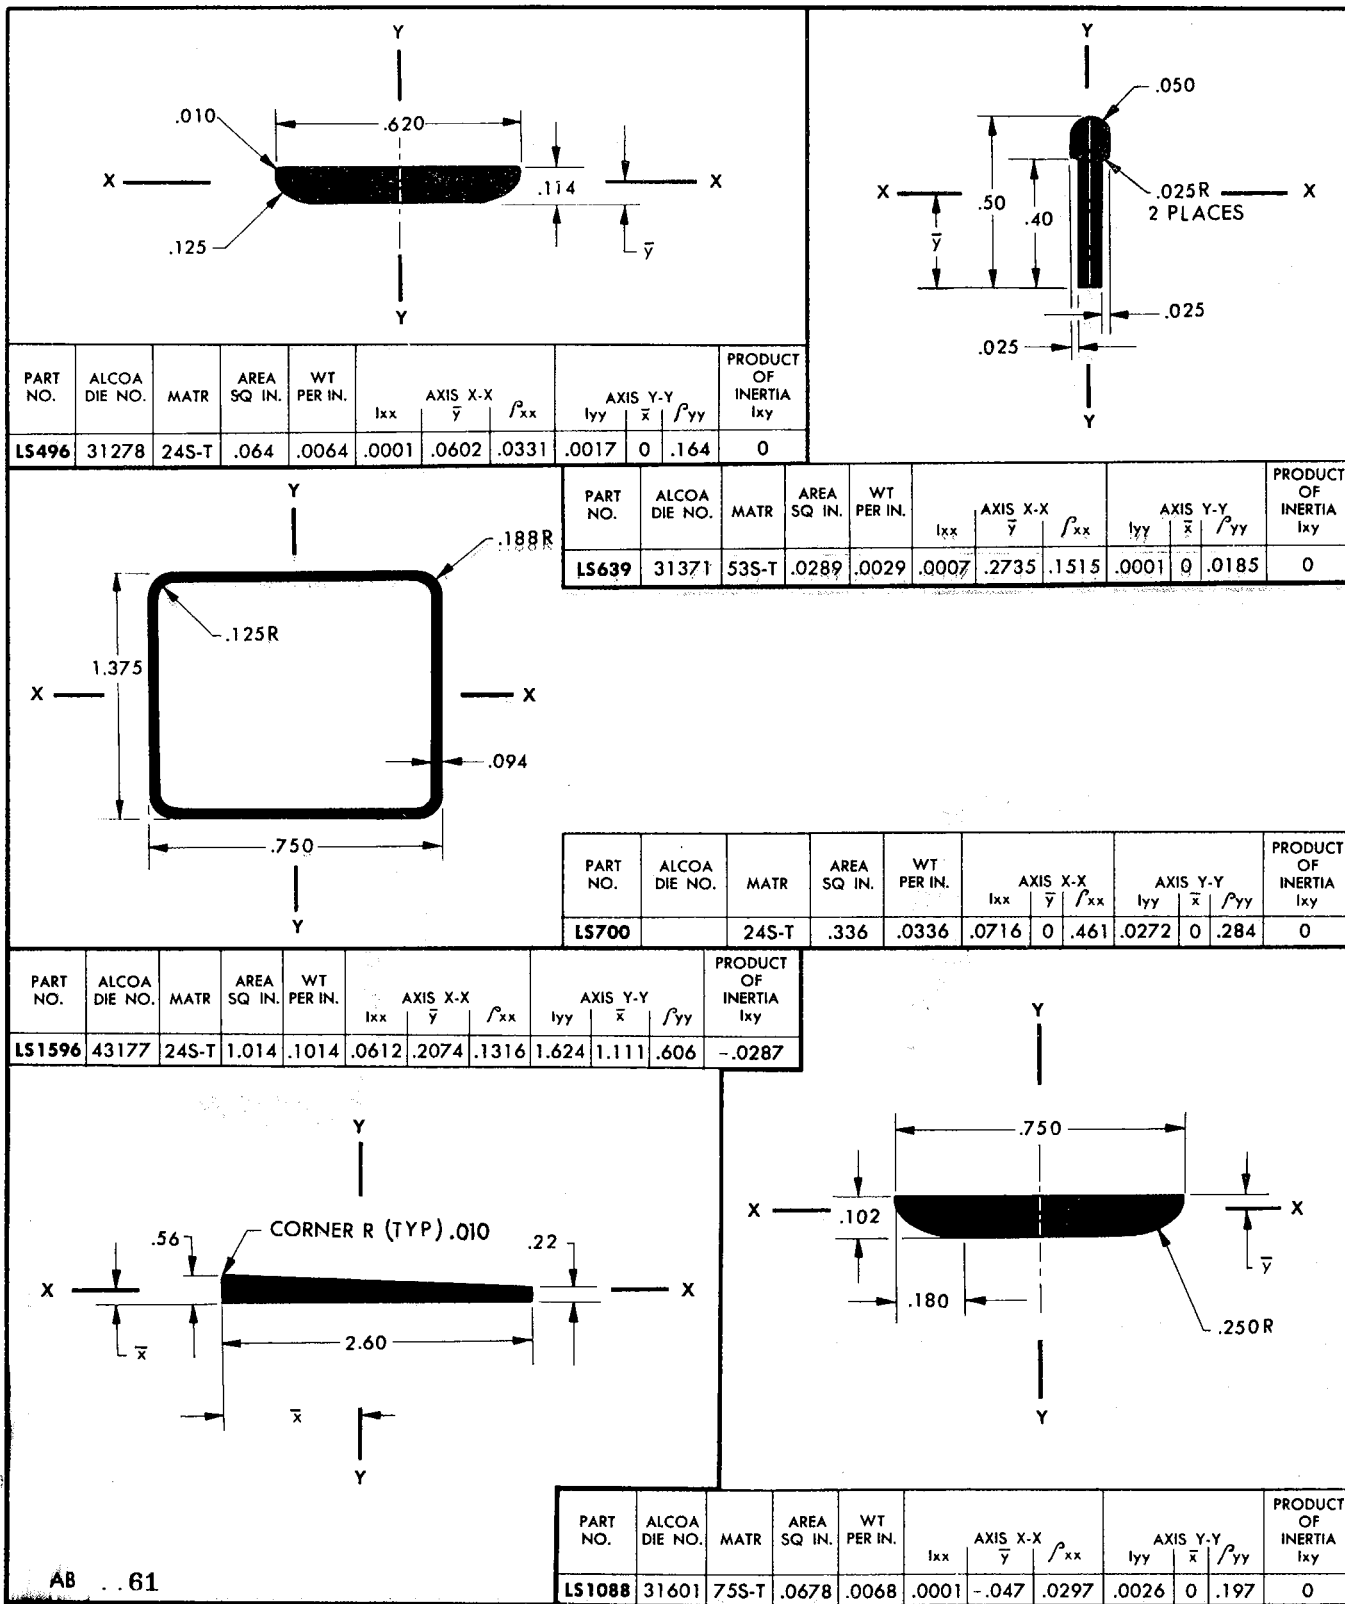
(Sheet 17A of 17 Sheets) — Extruded Standards
